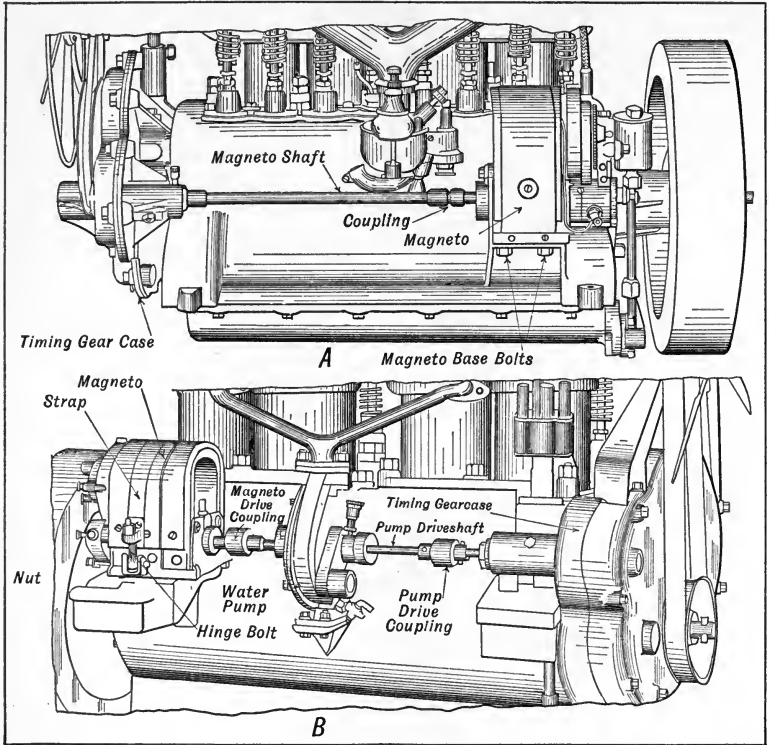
Conventional Methods of Placing and Driving Magneto Generators. A—System Used on Regal Engine. B—Magneto is Driven from Pump-Shaft Extension on Velie Motors.
